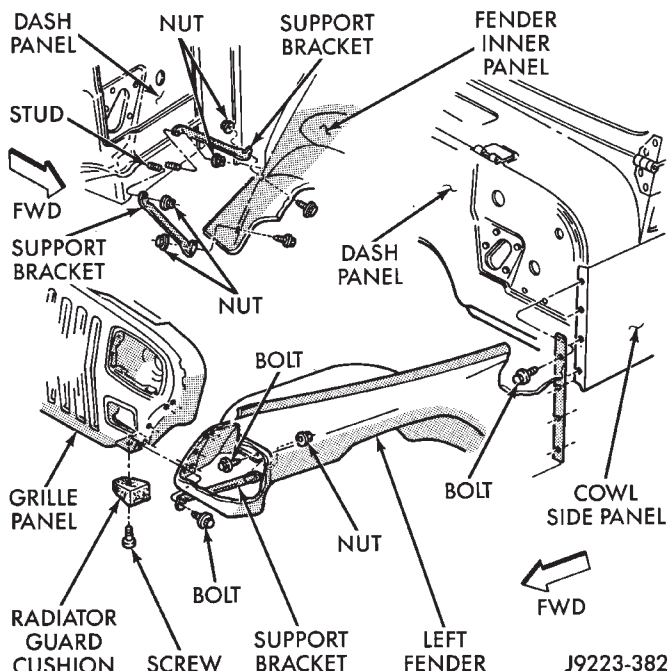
Fender Front and Rear Attaching Bolts/Nuts
